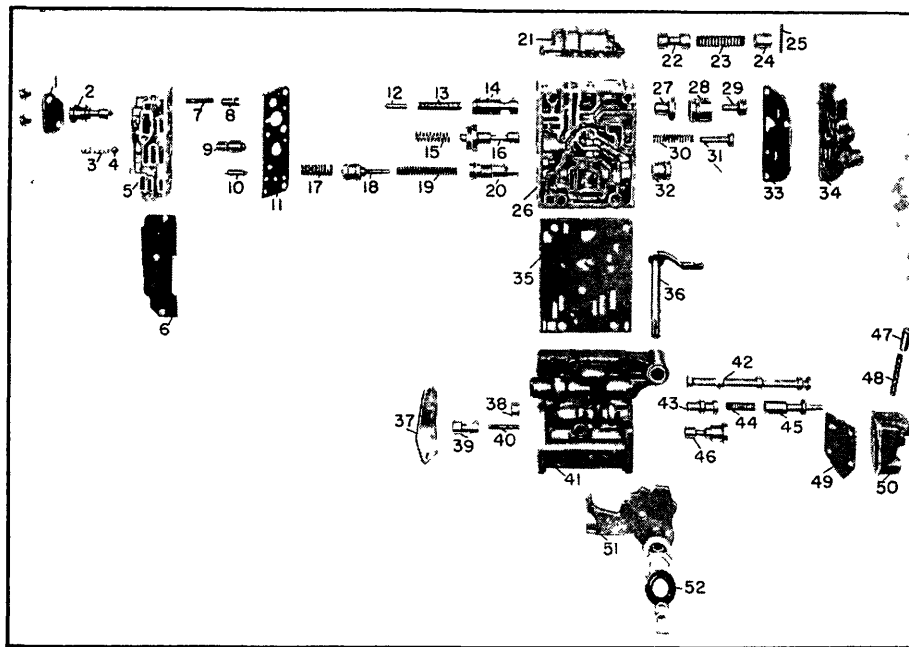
1952 CONTROL VALVE ASSEMBLY
